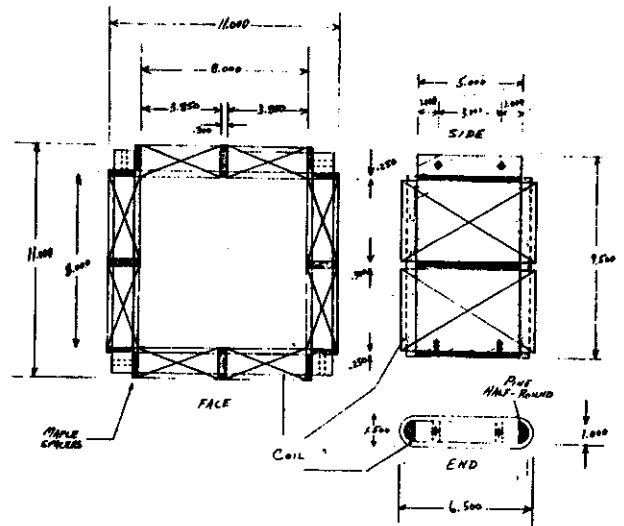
Three-view mechanical drawing showing face, side and end of side. The maple spacers and pine half-rounds are shaded. The coils are designated with an X.
